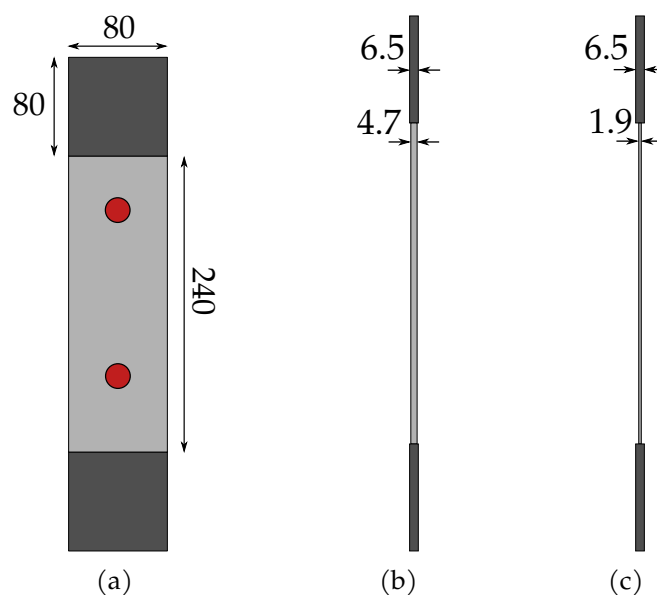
Geometric properties of L0 coupons: front view with PZTs (a), EMB side view (b) and UPAT side view (c). All dimensions are in mm.
